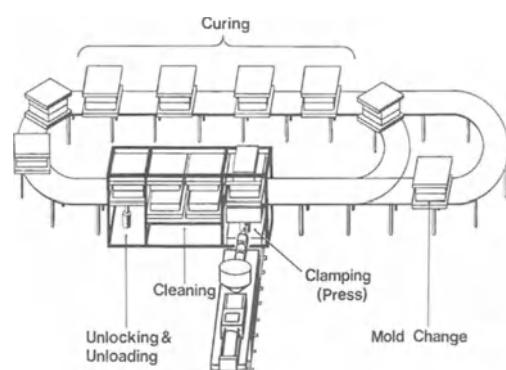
Schematic of the IMPCO Trak molding machine.
